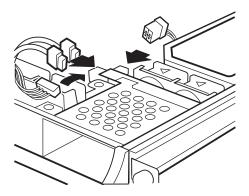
Connecting Cables to the SAS IF Assembly
